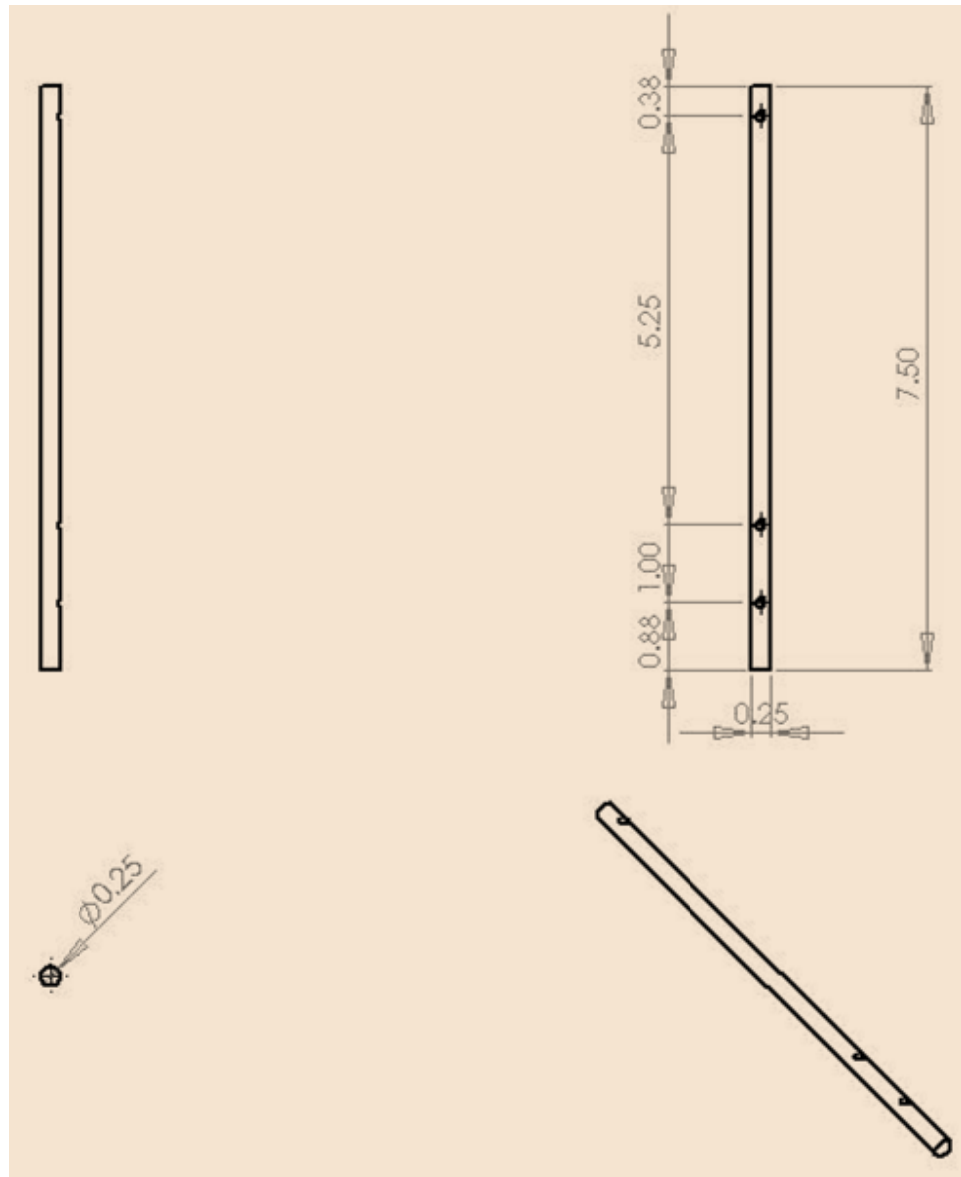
Stainless steel strut rod that couples H-arm to motor cross arm. All dimensions in inches.
